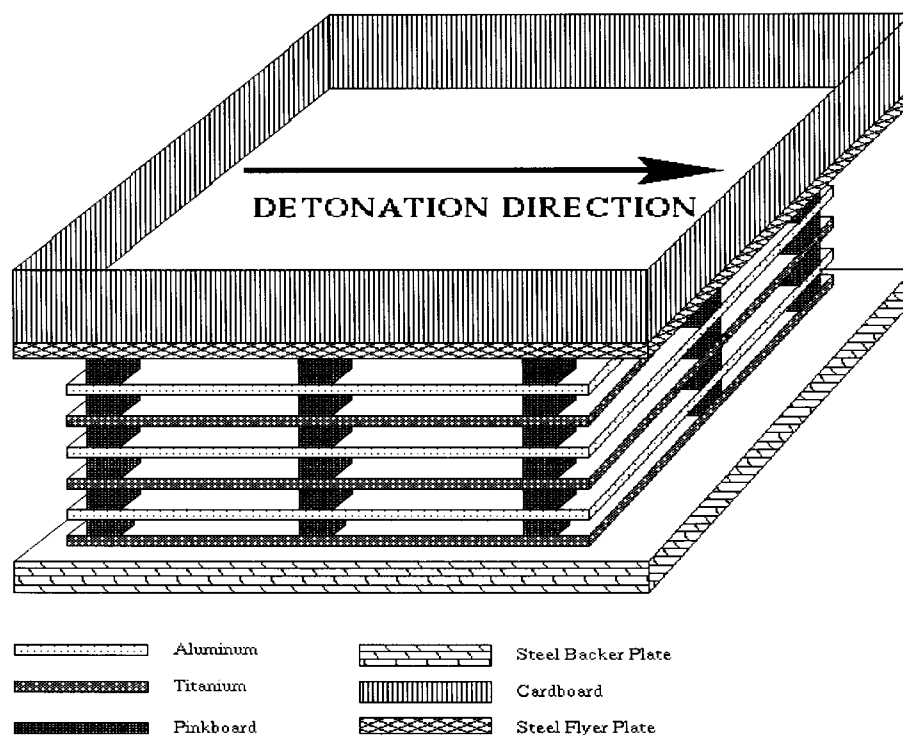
Experimental set-up for explosive welding of Al-Ti laminates.
